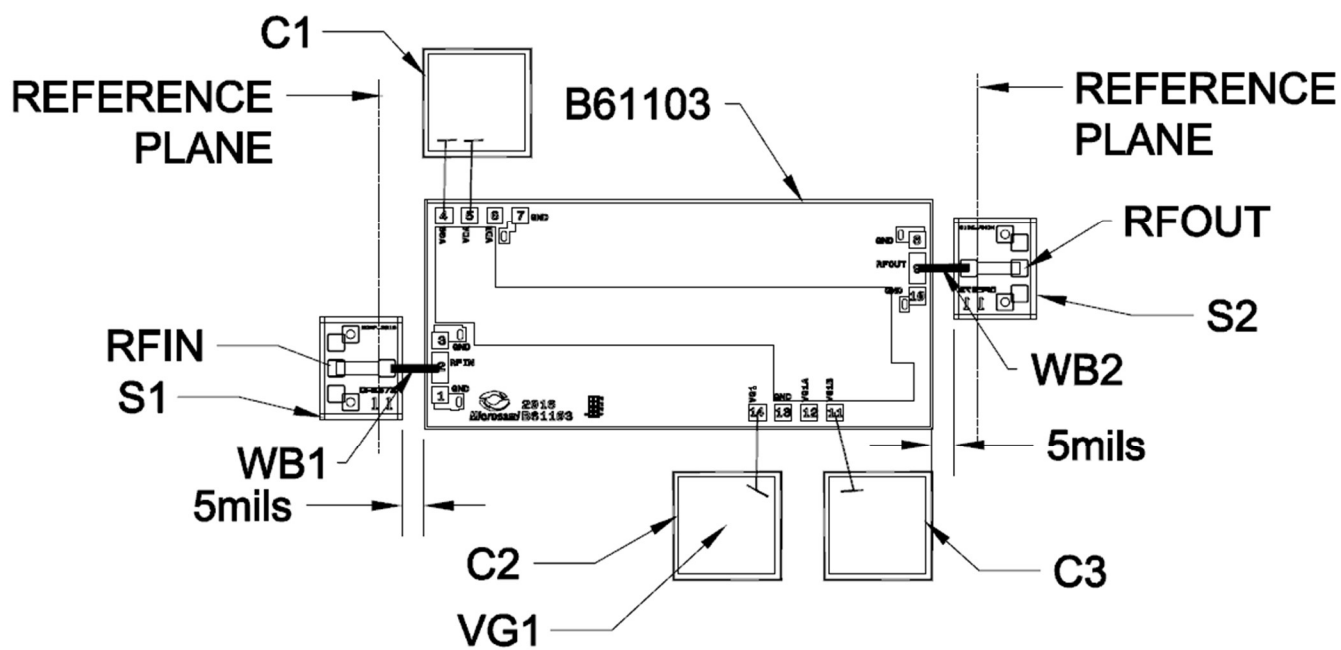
Test Circuits DC-26 GHz: Assembly Drawing
